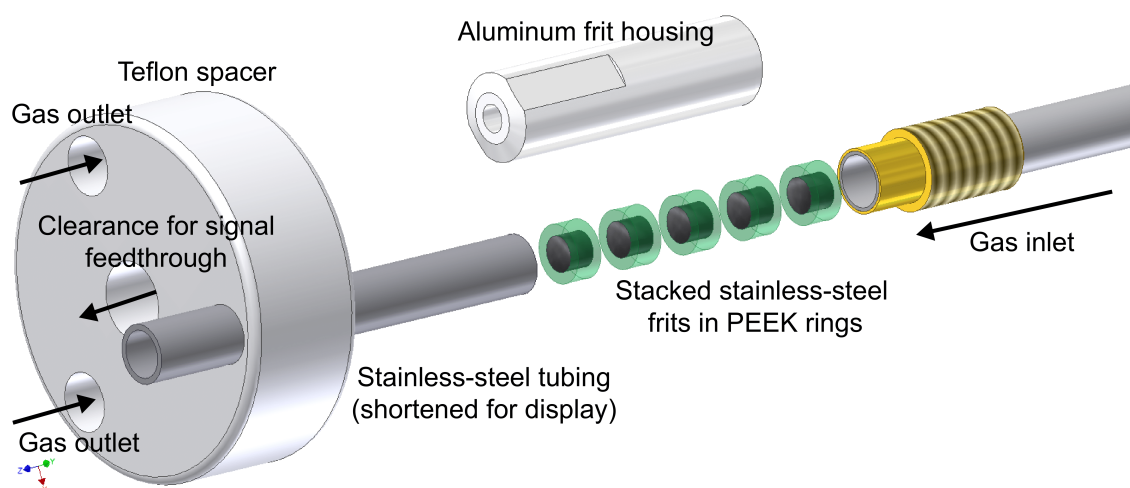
Exploded schematic of the JT-cooler [97]. The teflon spacer is the modified version of the one shown in Fig.reffig:frontEndPreamp.
